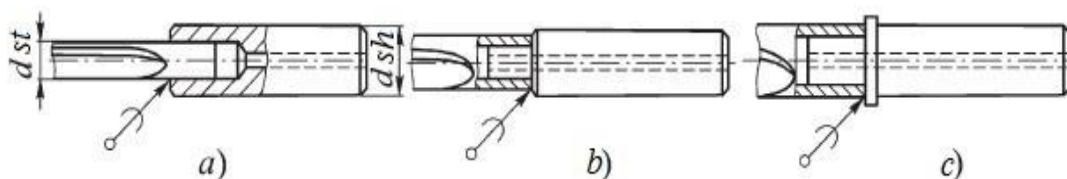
Types of brazed joints of stems and shanks of gun drills from the company Gühring (Germany):
